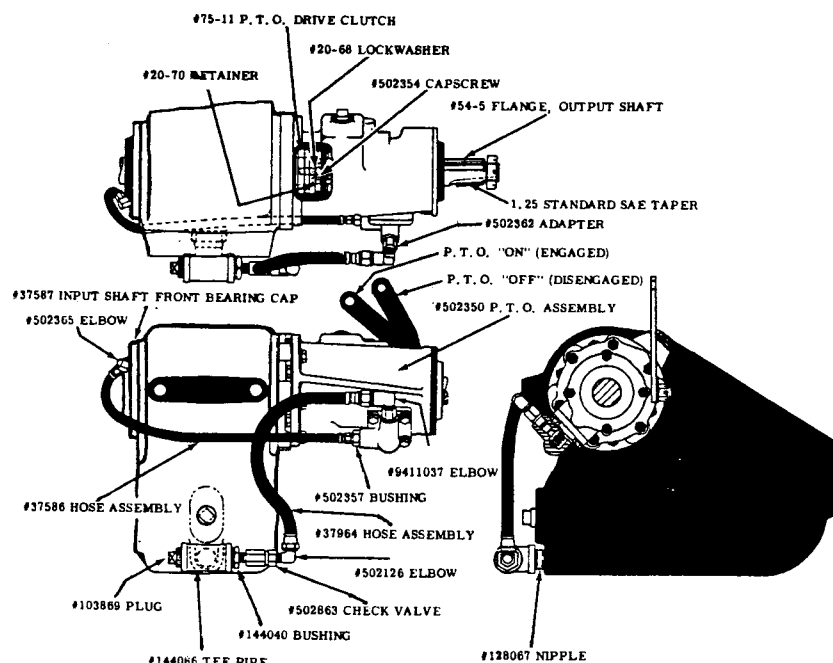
T-223 Power Take-Off Assembly Oil Pump
